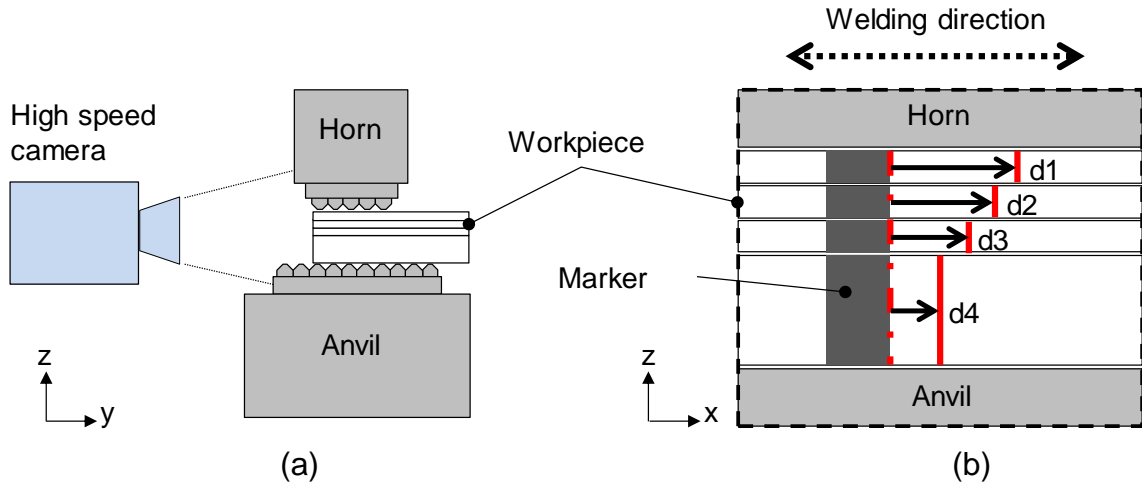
Schematic of high-speed camera setup: (a) workpiece stack-up aligned with horn (side view); and (b) displacement measurement of metal layer (front view)
